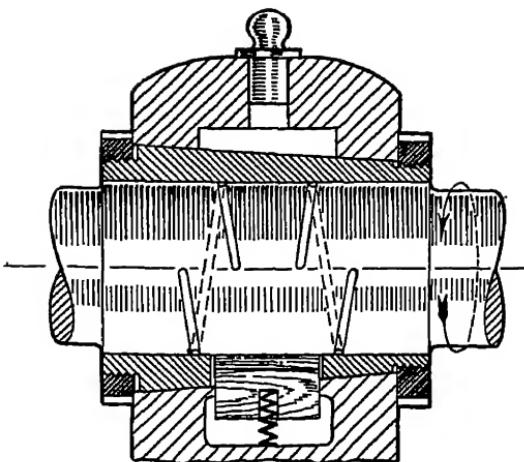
ADJUSTMENT ON TAPERED BUSH BEARING
